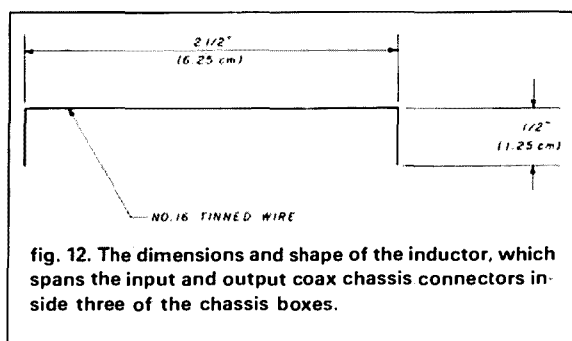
The dimensions and shape of the inductor, which spans the input and output coax chassis connectors inside three of the chassis boxes.
